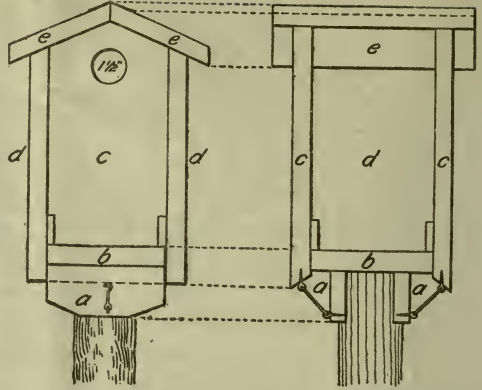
Diagrammatic drawings of bluebird house. This house can be removed from its floor by unfastening two wire hooks.
